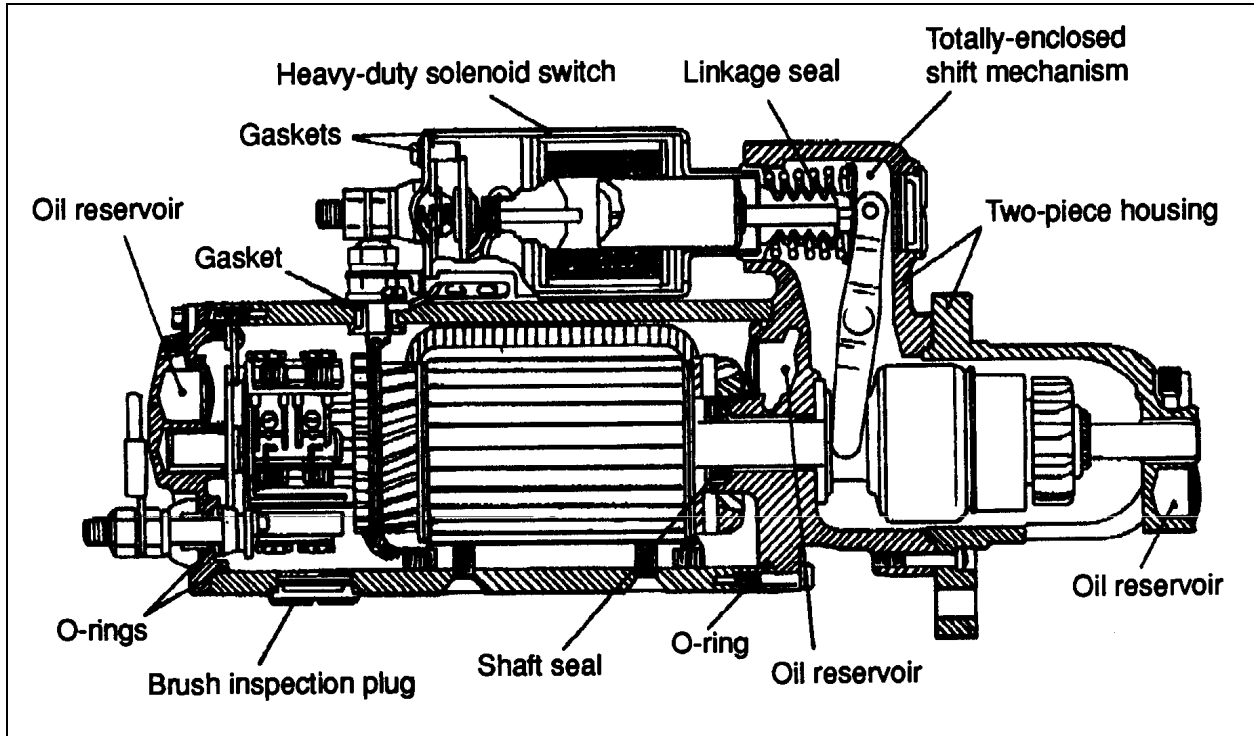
TYPICAL CRANKING MOTOR CROSS SECTION
